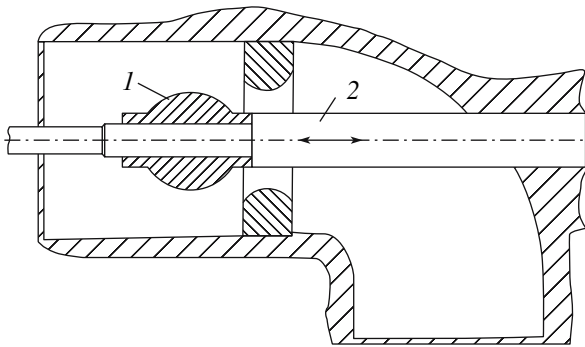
Outlet throttle: (1) ball valve and (2) driving rod.
